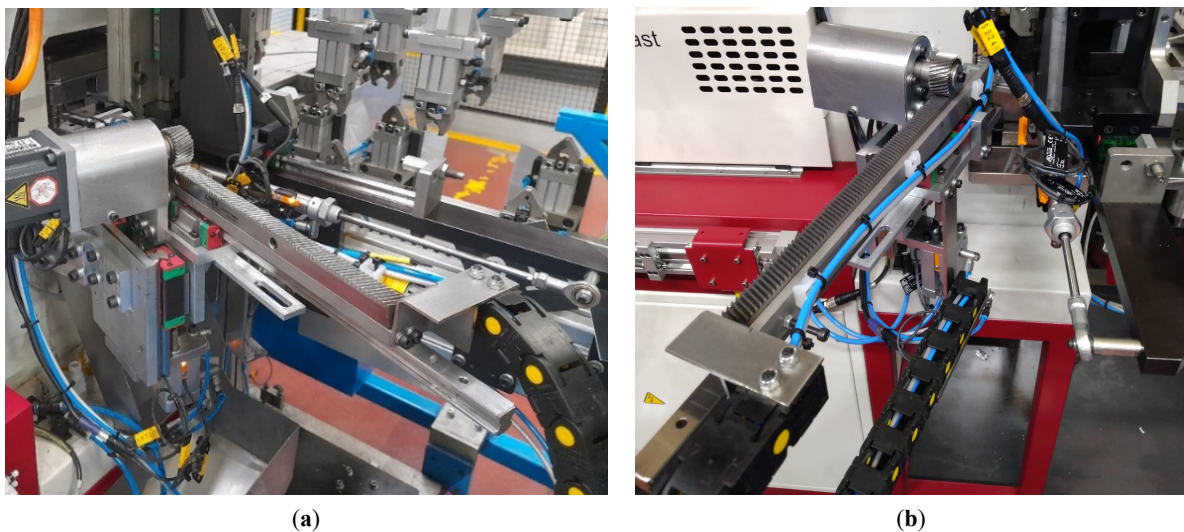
Assembly mounted on the injection moulding machine: view 1 (a) and view 2 (b).
